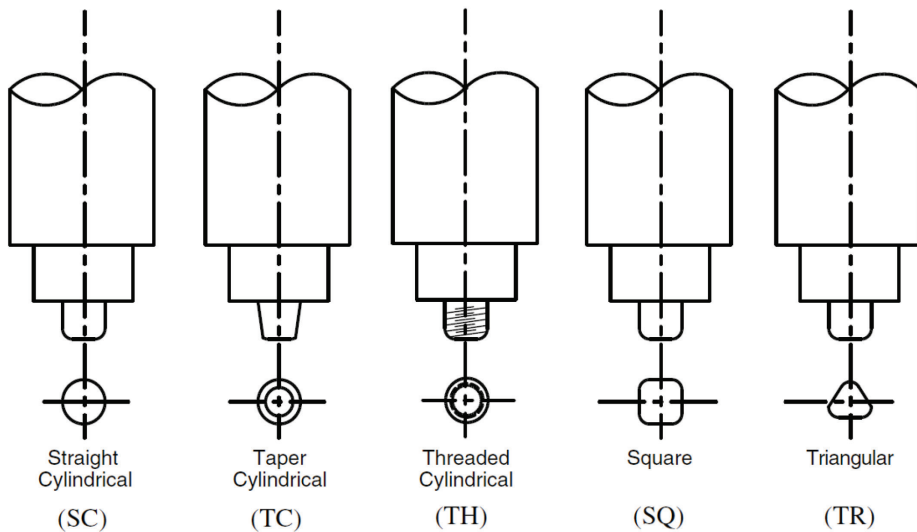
FSW tool pin profiles (Elangovan, 2008).
